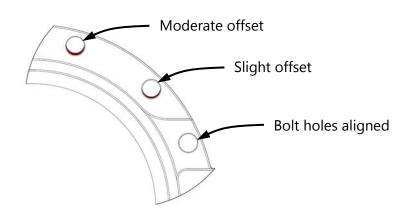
Housing segment bolt hole offset (Pin 1 alignment)
